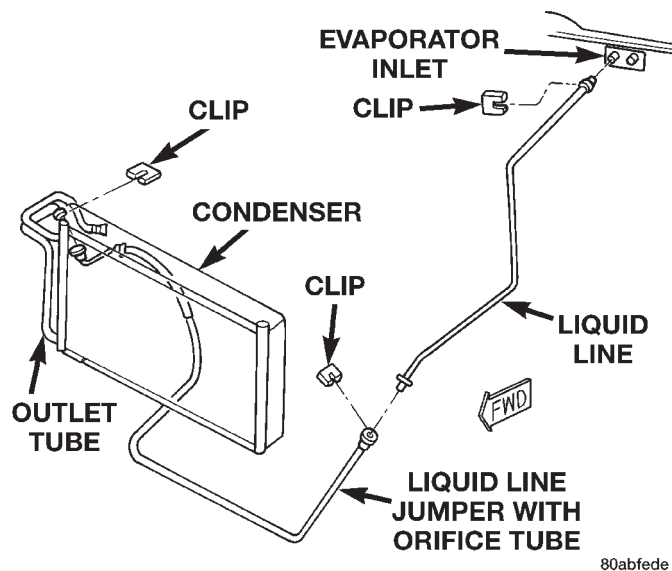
Liquid Line Remove/Install - Right-Hand Drive 4.0L Engine
